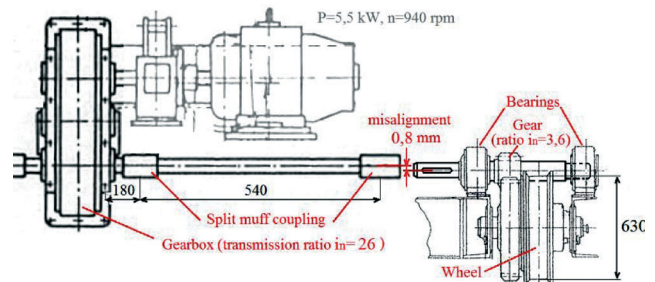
Misalignment between the gearbox shaft axis and drive shaft axis of the wheel
